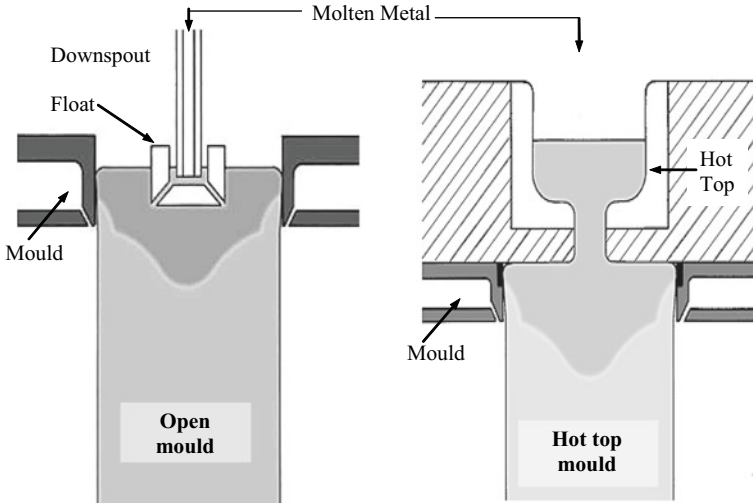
DC casting with open top mould controlled by a float (left) and hot top casting (right)
